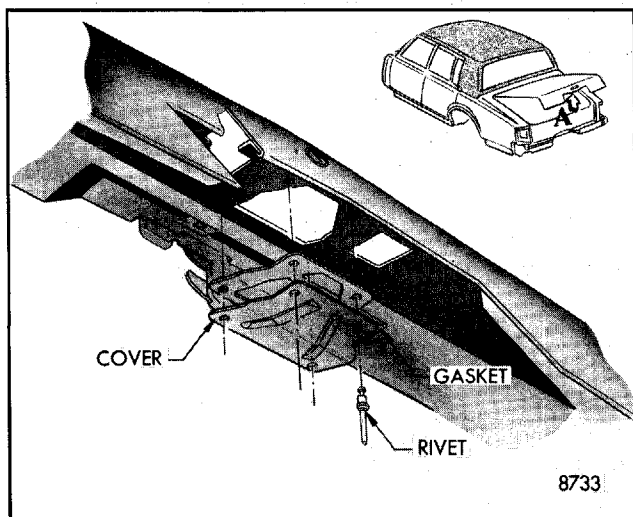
Lock Cylinder Access Hole Cover "K-69" Style
